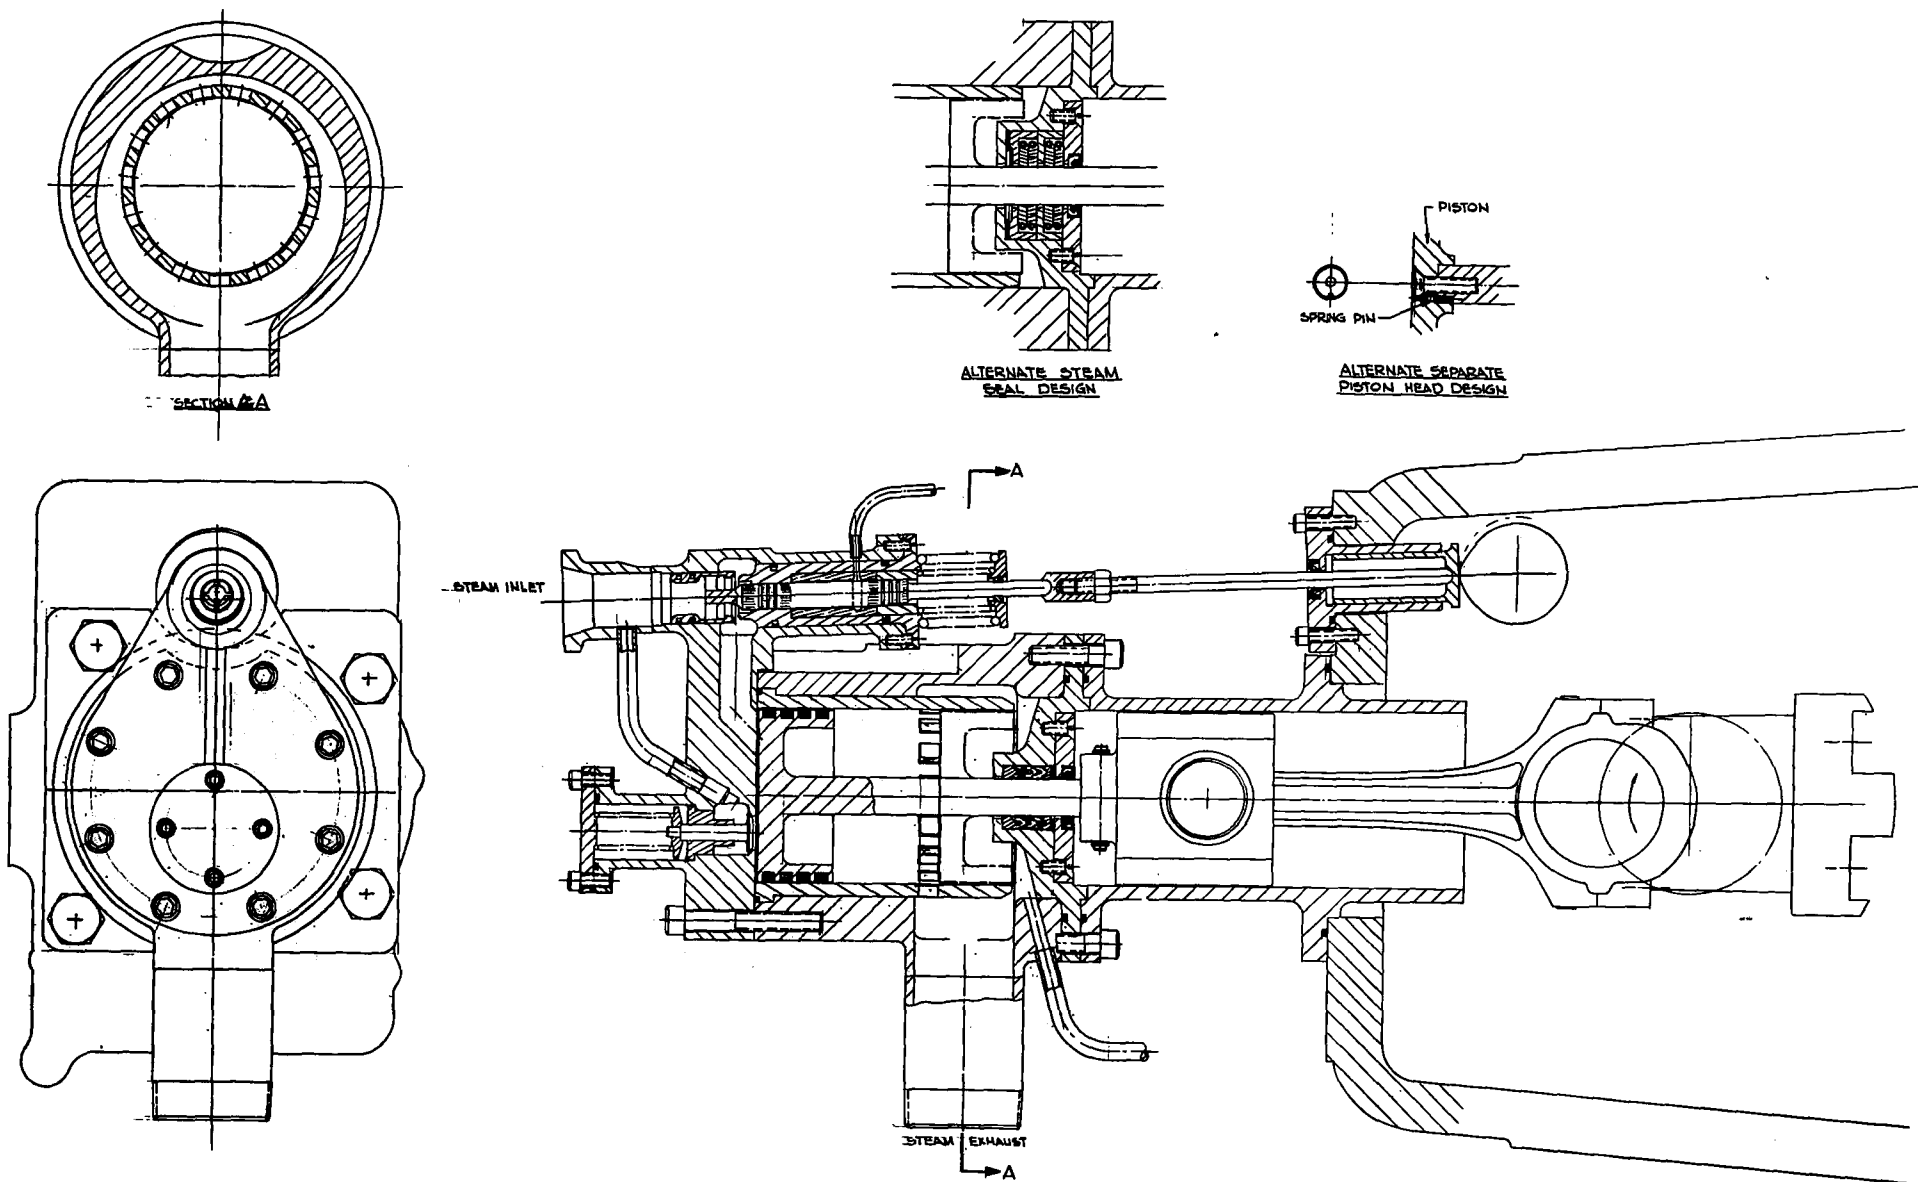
Piston Ring Packing - Sleeve Valve Steam Expander - Crosshead Type Piston (GE Dwg. 707E705).
